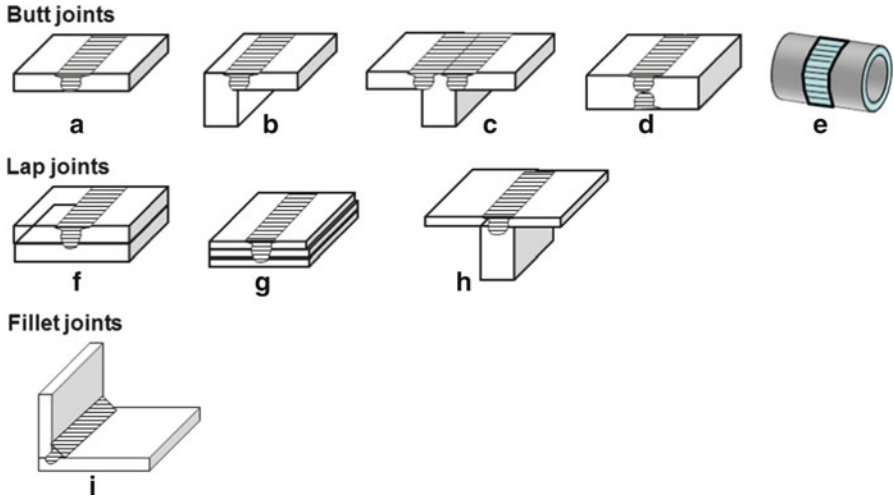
Joint configurations for friction stir welding: (a) single side square butt, (b) edge butt, (c) T butt joint, (d) double side square butt used for thick plates, (e) tubular welds with single side butt joint, (f) lap joint, (g) multiple lap joint, (h) T lap joint, and (i) fillet joint
